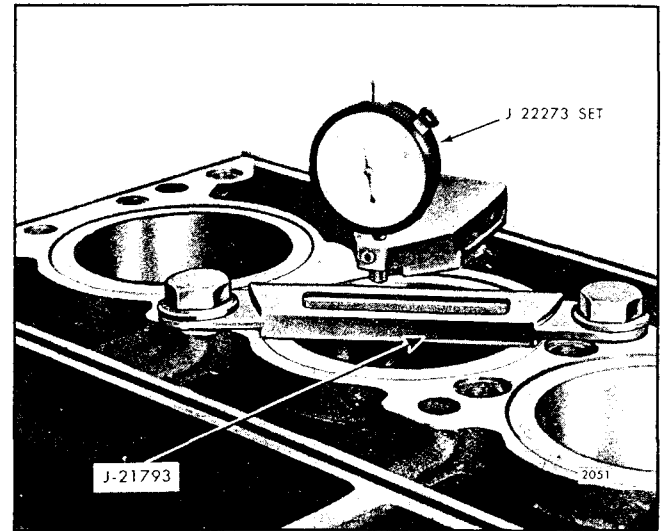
Checking Distance of Liner Flange Below Top Face of Block
